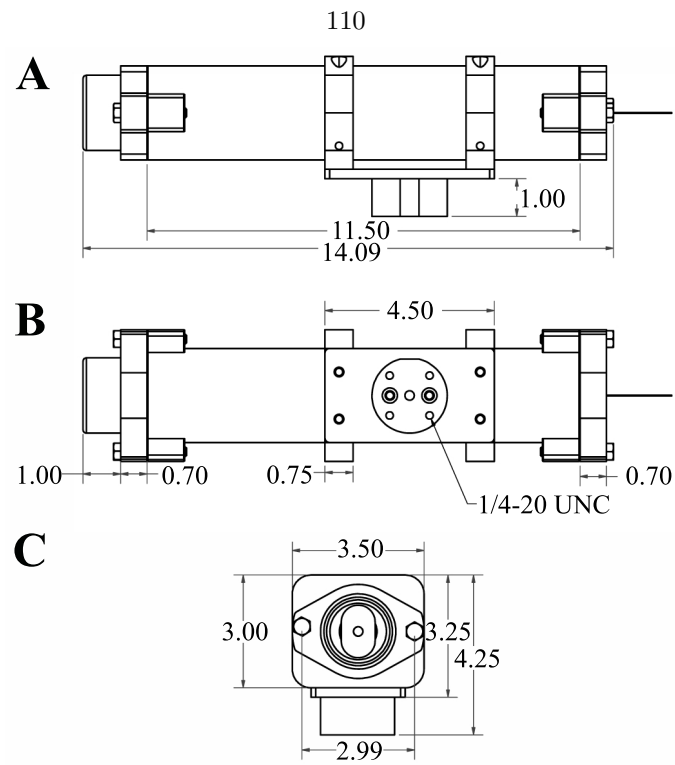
Dimensions of the Orion laser housing from the (A) side, (B) top, and (C) front views.
